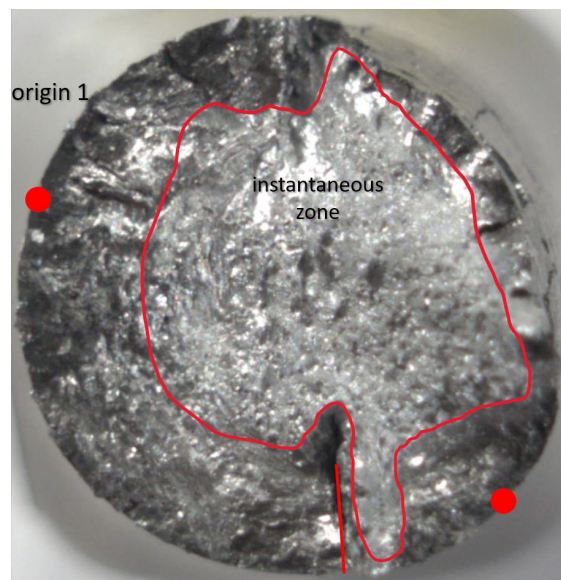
Fracture of a sample made of 6060-T64 aluminium alloy without cyclic torsion treatment (sample F3)
